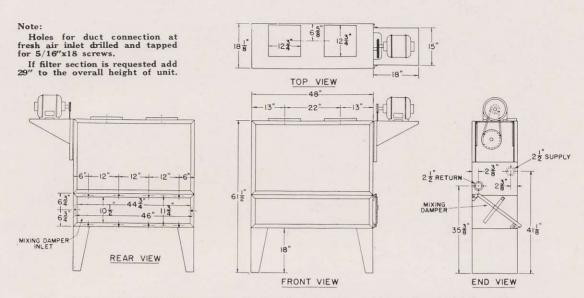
No. 1848 Type "R" Unit Heater. Floor Mounting. Mixing Damper.
